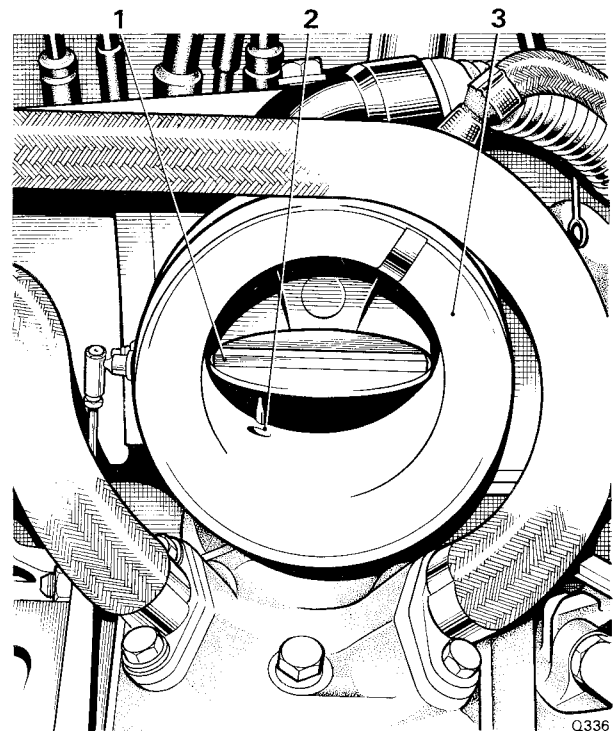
HOT IDLE MIXTURE COMPENSATOR FEED
